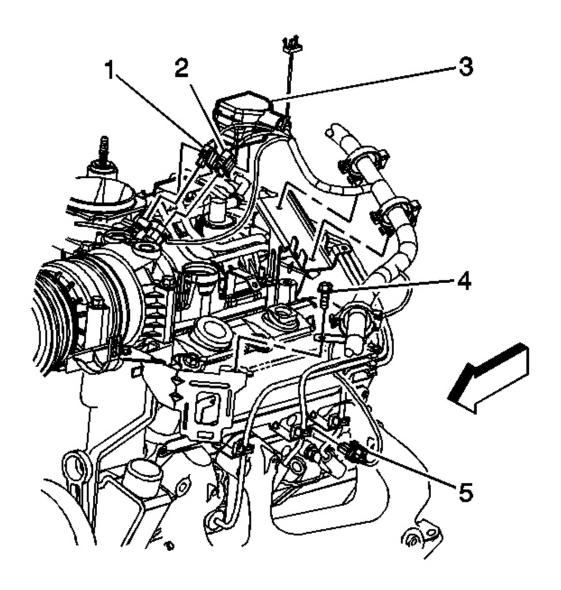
View Of TP Sensor, IAC Motor, ECT Sensor, Control Port Injector Module & Engine Harness Clip Bolt Courtesy of GENERAL MOTORS CORP.
